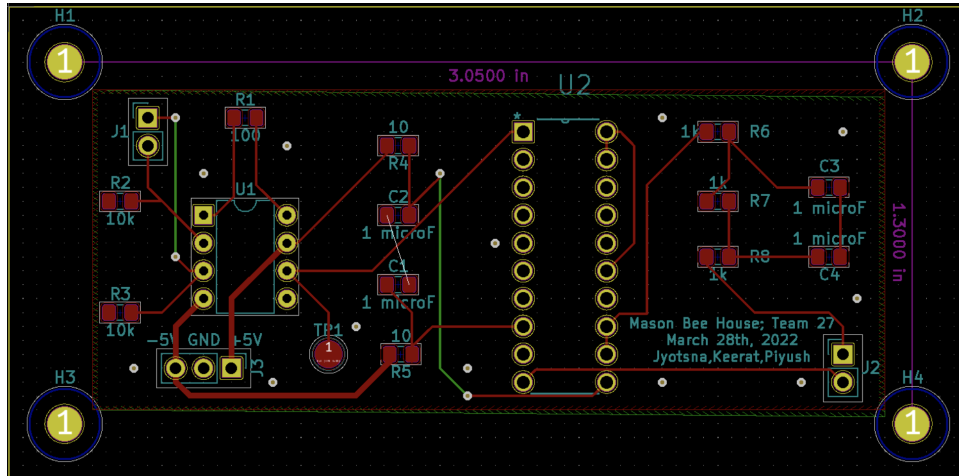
PCB layout of sensor board, including AC bridge, balanced demodulator, and low pass filters
